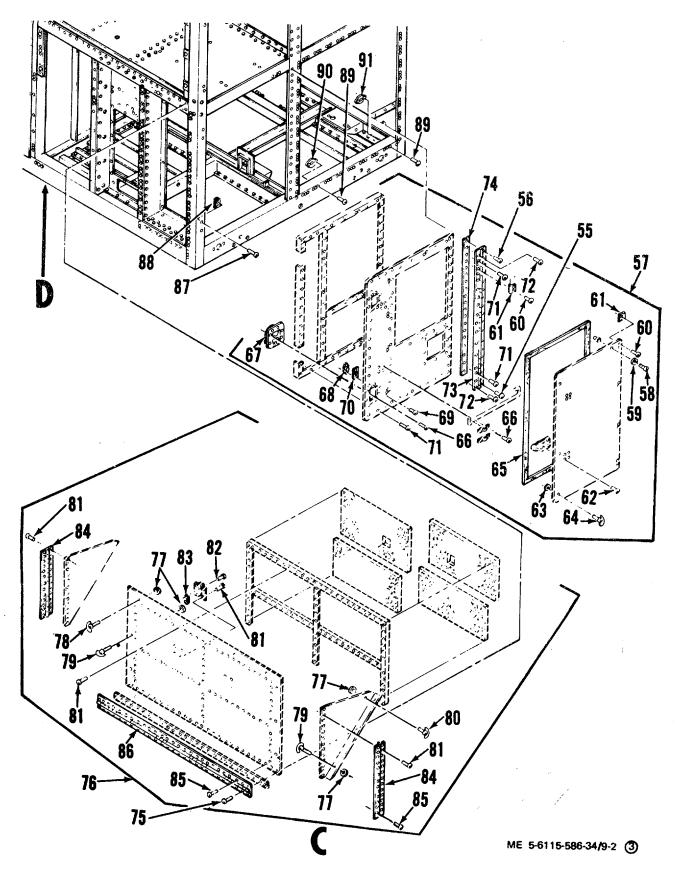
Shell assembly, exploded view. (sheet 3 of 9)
